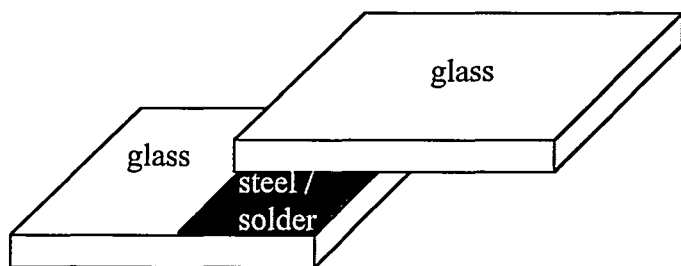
Lap-shear test specimen, glass-(steel)-glass.
